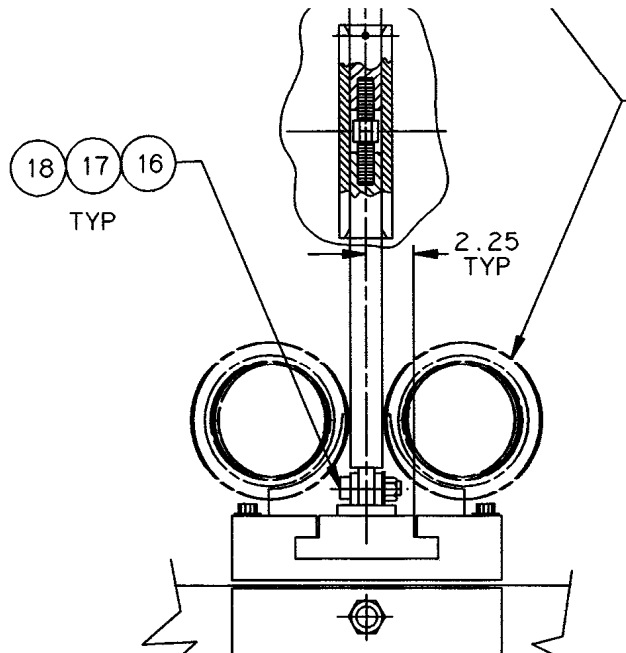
PF4 and 5 Strut Bolting Detail
